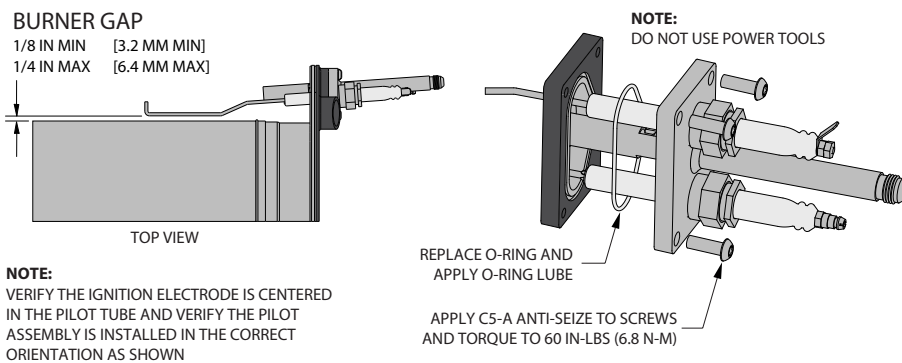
FLAME ROD DETAIL (EXE-4000-6000)
